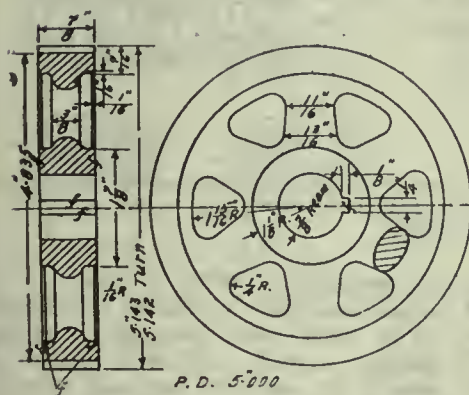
TYPICAL DETAIL OF DRAWING OF A SPUR GEAR
